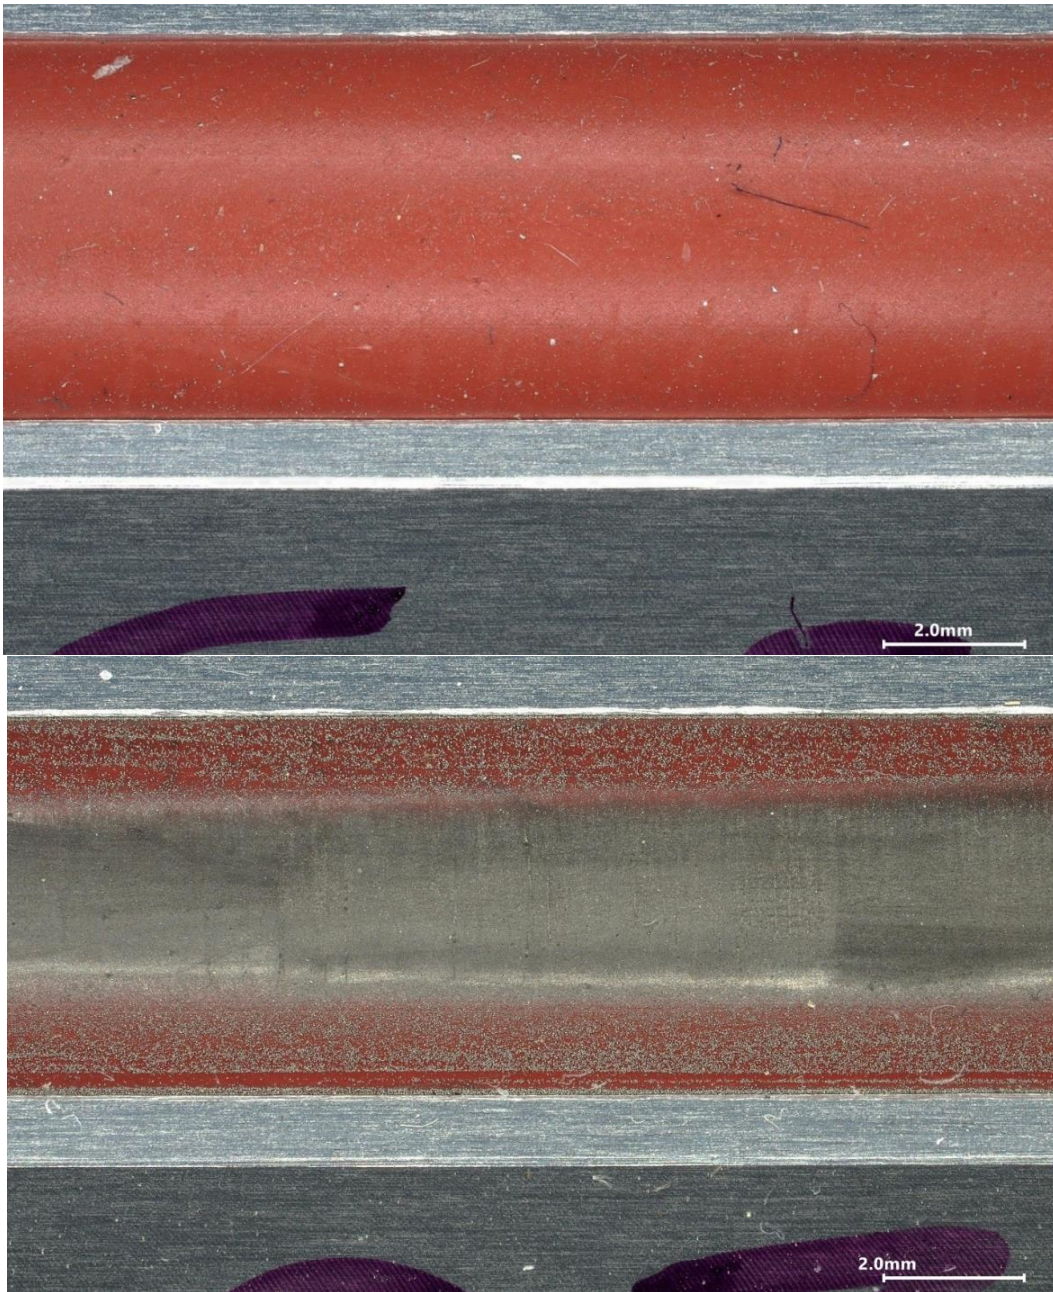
Recoater arm no. 3 before (top) and after (bottom) the print
